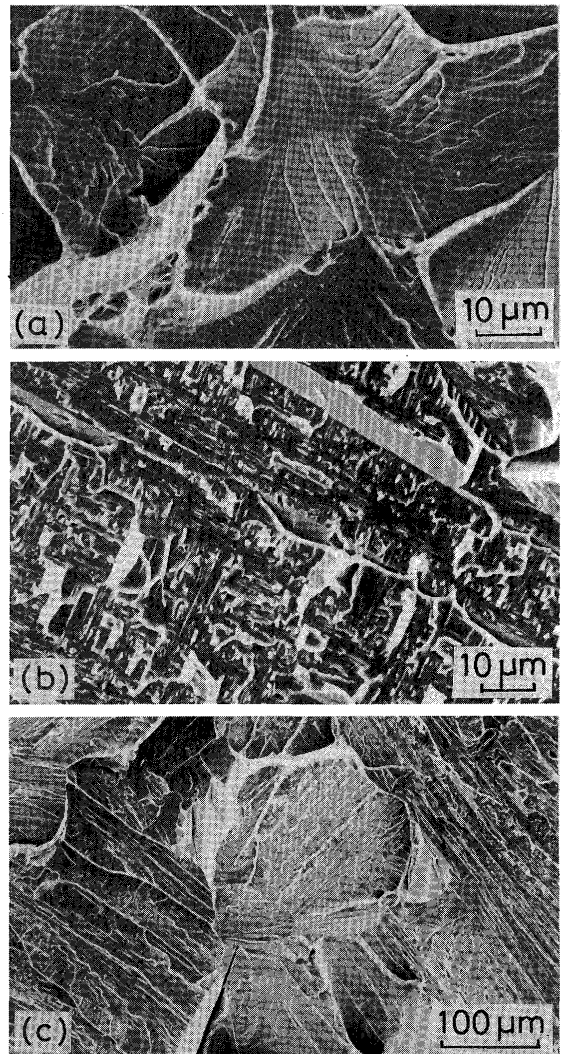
Fracture morphology of weld metal by 19Cr-2Mo steel filler metal.
